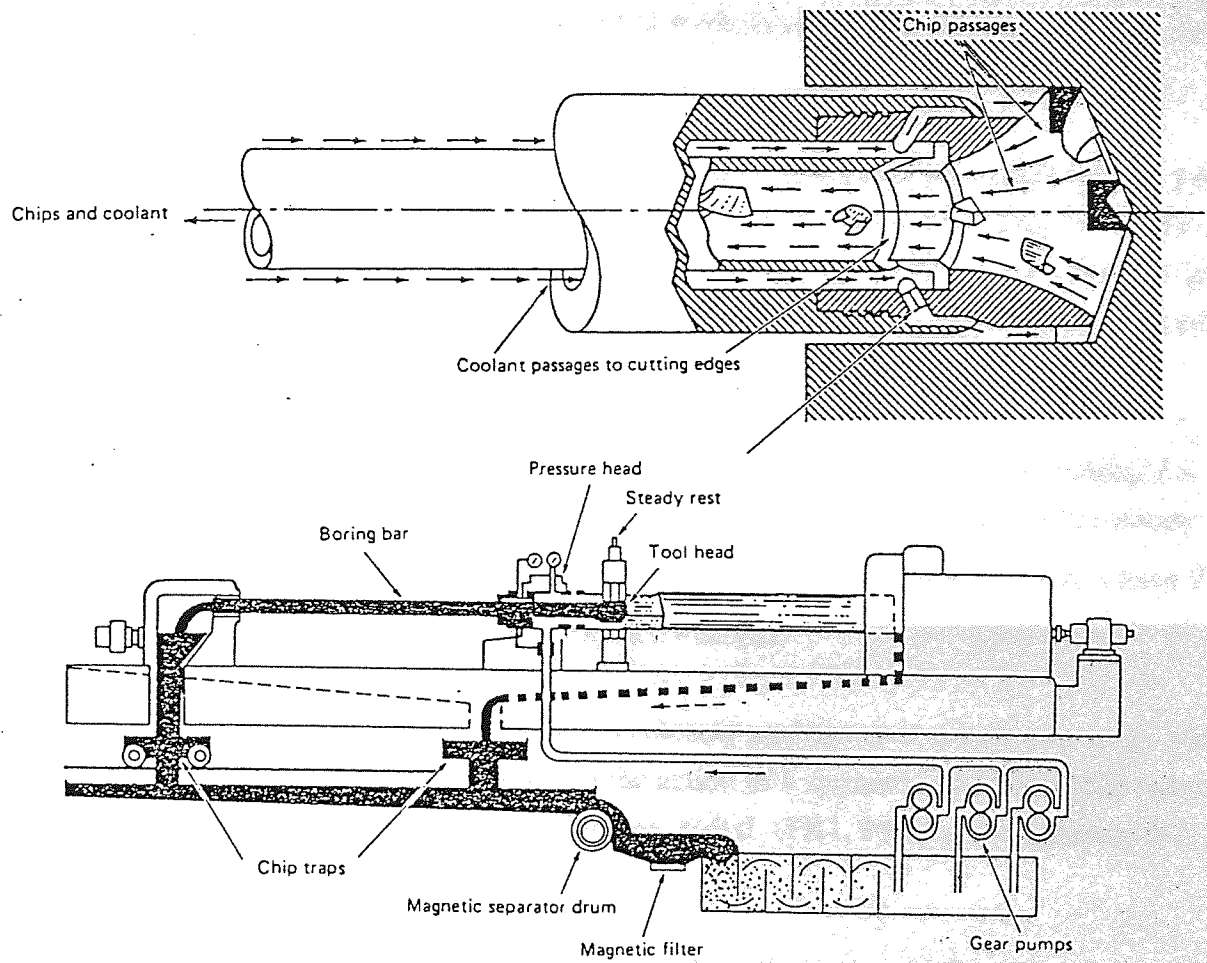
Horizontal Deep Hole Drilling Machine and Cutting Tool (Ejector Drill)
